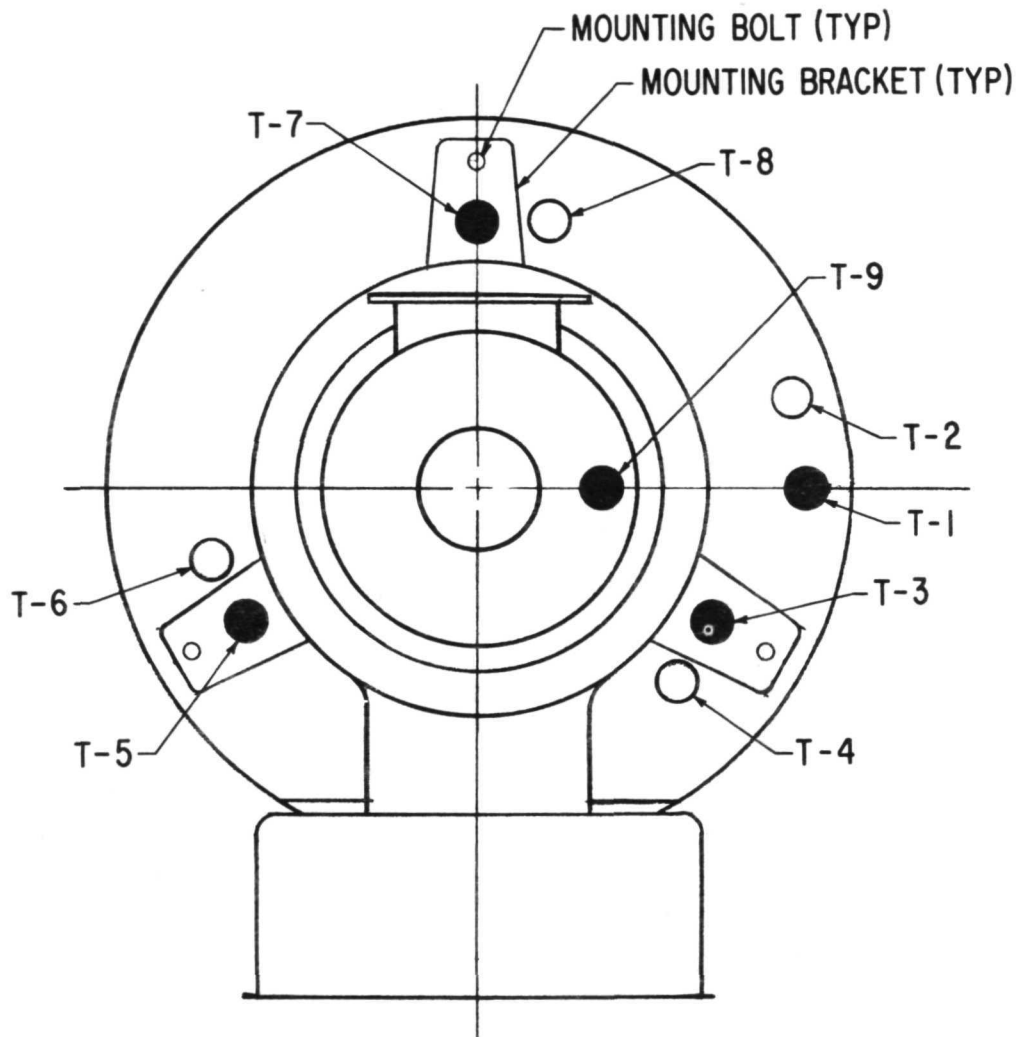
Accelerometer Locations on BRU Simulator and Vertical Support Fixture
